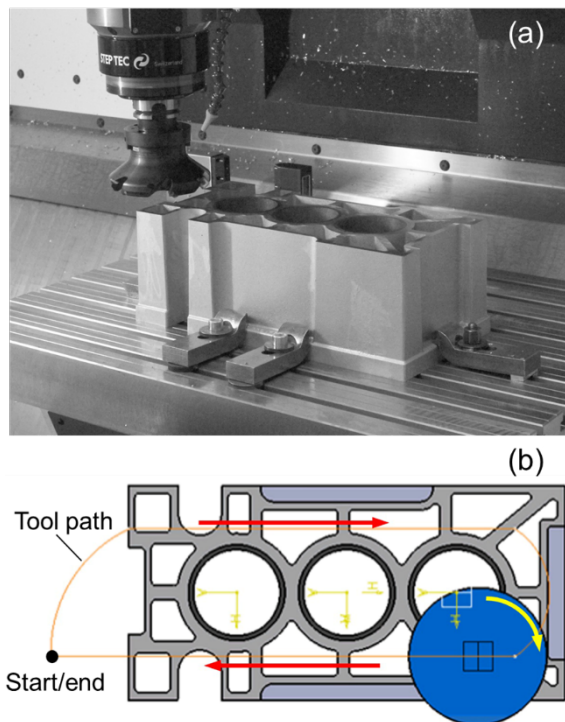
(a) The experimental setup for tool life test (b) and top view of bi-metallic sample indicating the programmed tool path.
